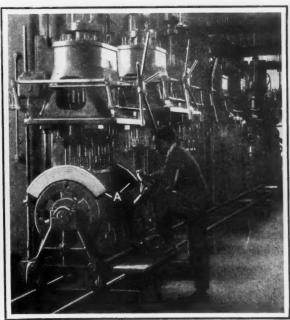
Track System for Fixtures used for Marine Engine Parts
